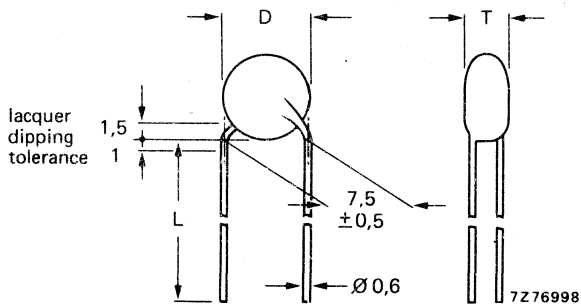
For dimensions D, T and L see Tables 1 and 2.
